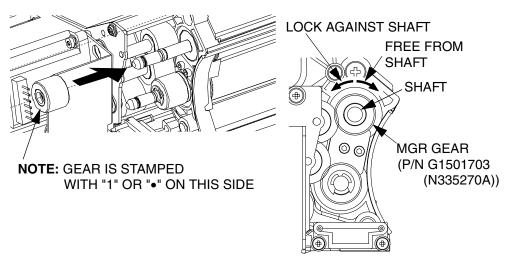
Removal of the MGR Gear (P/N G1501703 (N335270A))
